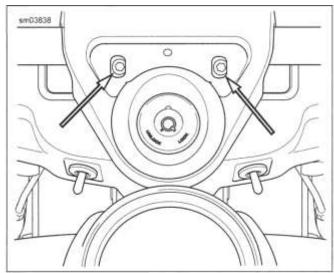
Loosen Upper Handlebar Clamp Screws: Road King
